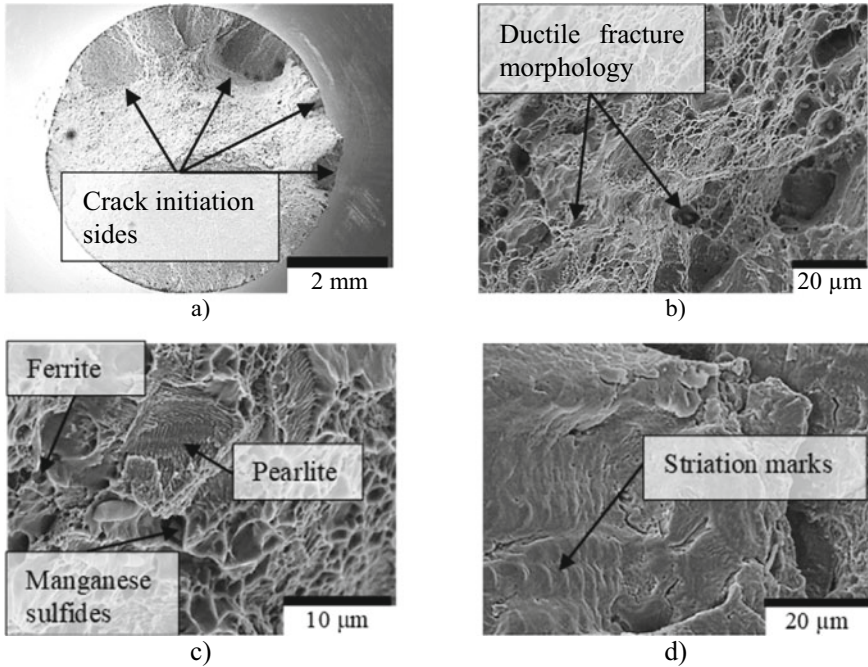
Fracture surface of case hardening steel 16MnCrS5 after tension/compression fatigue testing at LCF regime: a complete fracture surface, b ductile fracture morphology, c ferrite and pearlite fracture partitions and d striation marks
